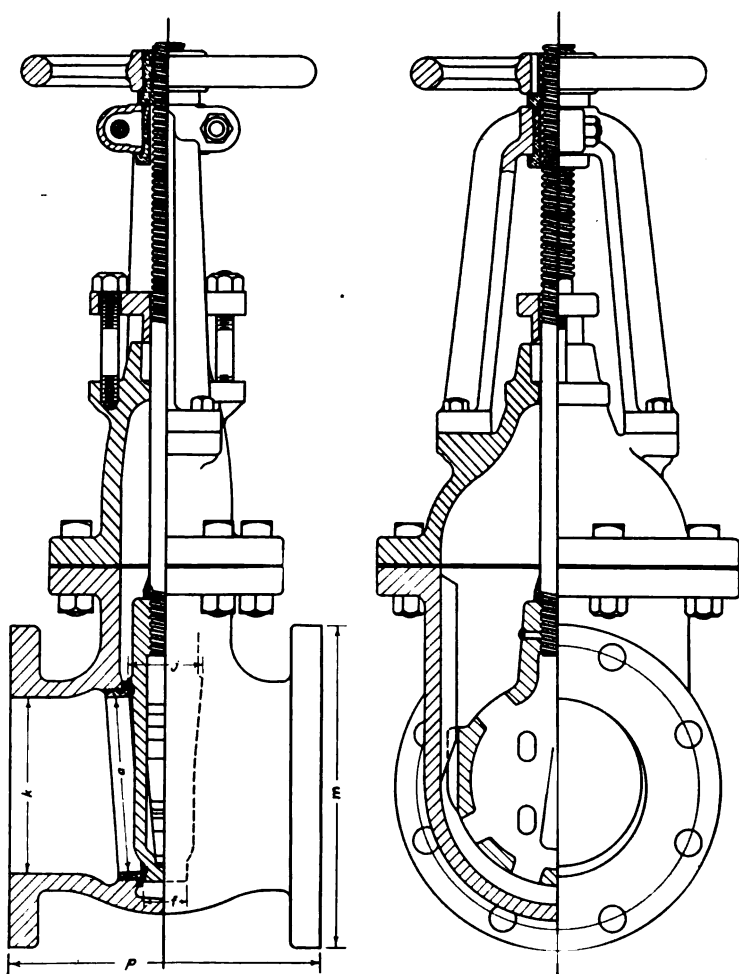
Drawing of 4, 6 and 8-inch Crane Gate Valves. Dimensions Given in Table 1 Page 24.
